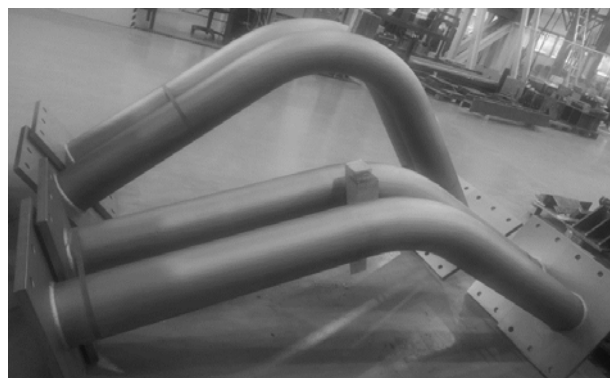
Elbows of X65 piping steel: SP5 to SP8 specimens [5].
